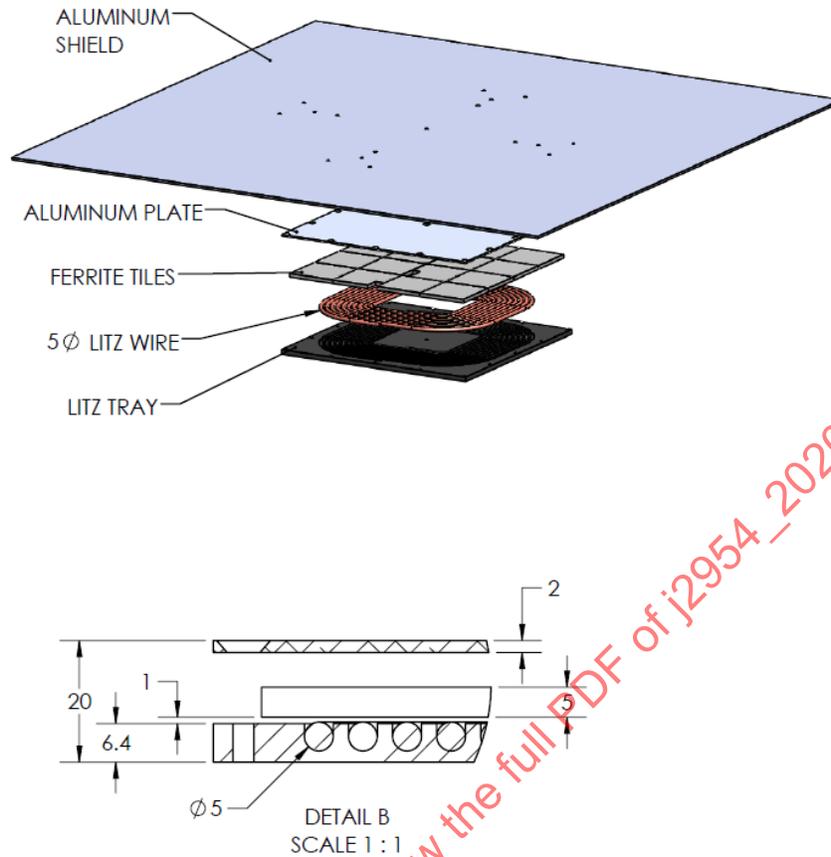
Exploded view of the Test Station VA WPT2/Z1
